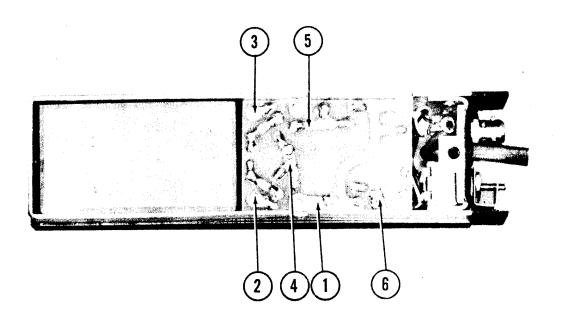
COMPONENT LAYOUT AND TEST POINTS
